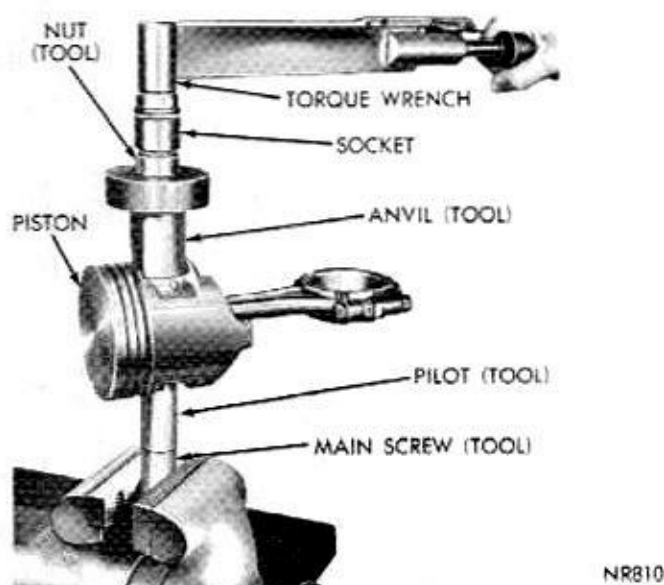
Testing Fit of Piston Pin in Connecting Rod
